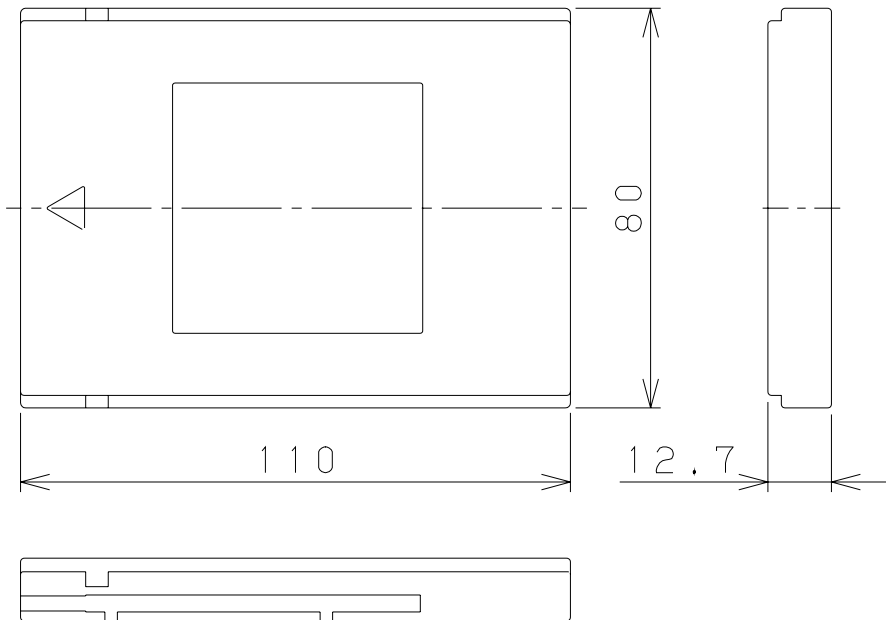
Outline drawing of iVDR drive Standard type [Unit: mm]
